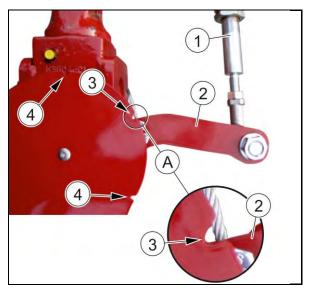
(shows steering rod on the righthand side of the tractor's coupling device)
